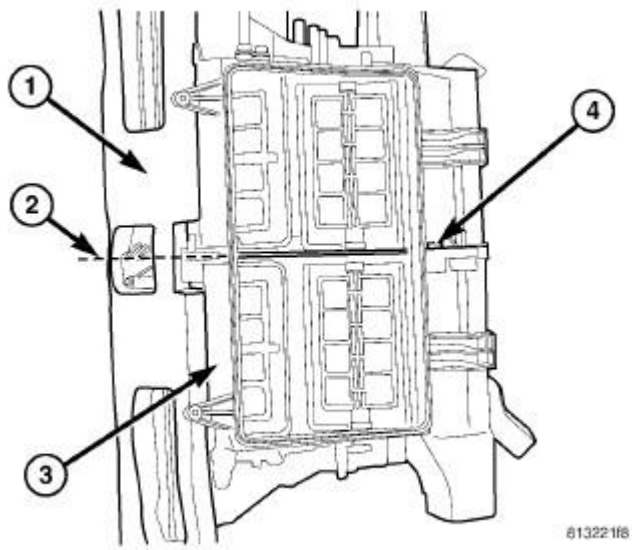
Air Housing-Seal and Screws Removal & Installation
